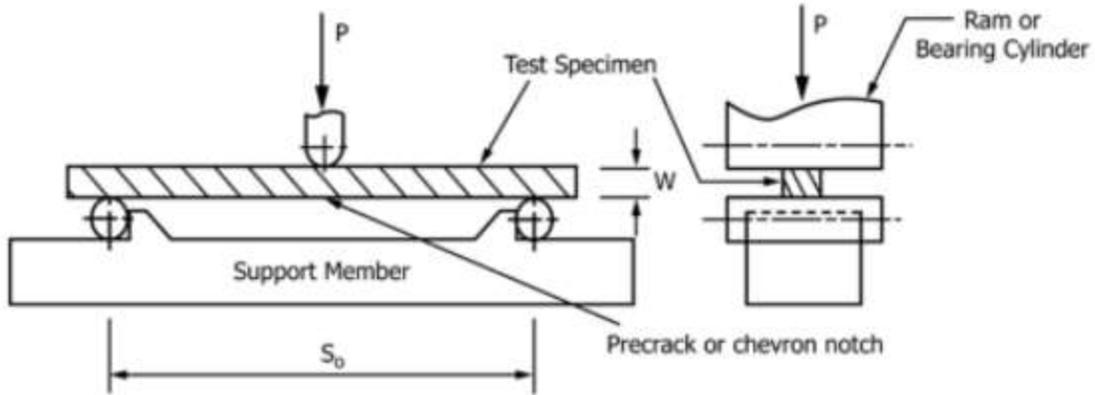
Detailed fixture requirements for precracked beam (pb) method. The width (W) is equal to 4mm and the outer span (S_o) between the rollers is 16mm. Rollers on the bottom should be free to articulate. [18]
